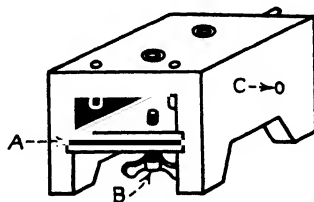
A jig with a sliding lid or plate A, that carries the clamping screw B. Lid stops against pin C which projects inside.
